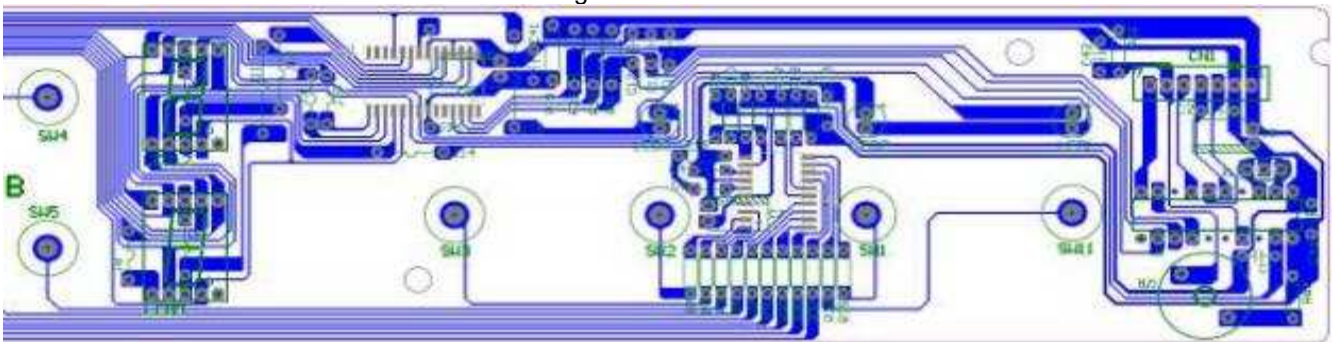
4 - PCB layout of Control PCB for model C74E-BBCC02
